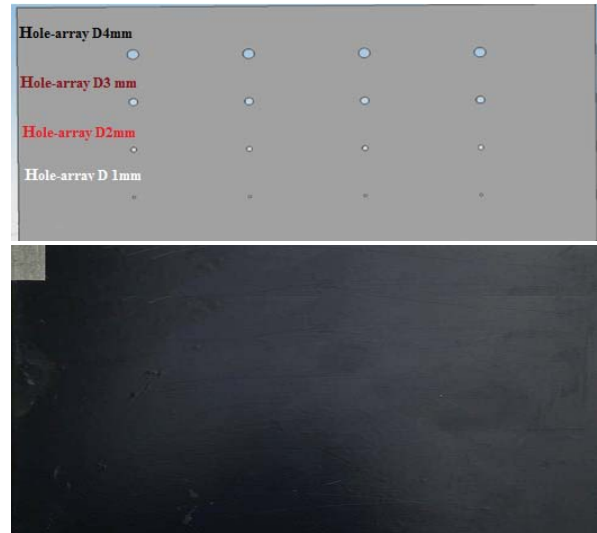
sample covered by Mask and as desired array holes 4x4 of Aluminum sheet
